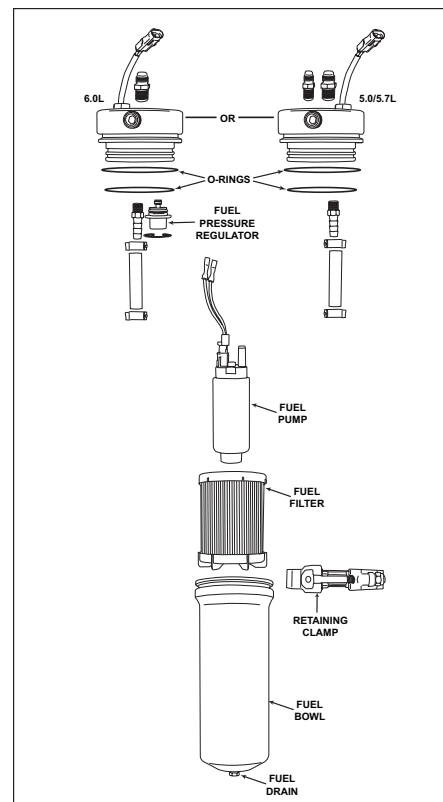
Fuel Control Cell (FCC) - Clamp-on Canister (Typical)
